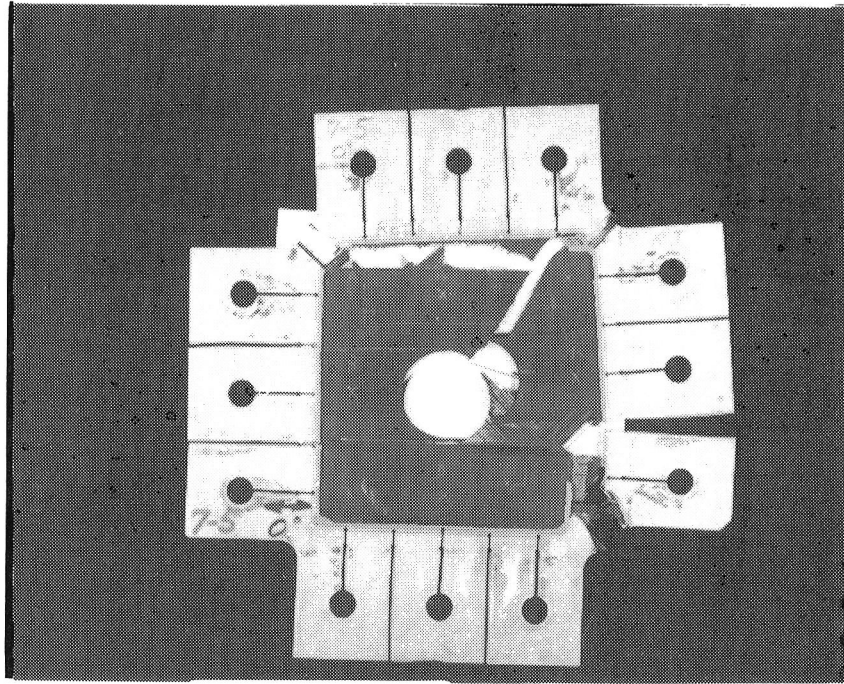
Photograph of fractured specimen 7-5 showing other modifications.
